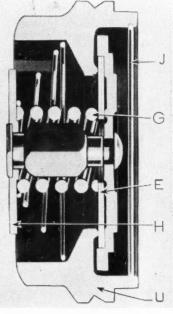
The compression and intake valve, located in filler plug end, showing the order of assembly.
